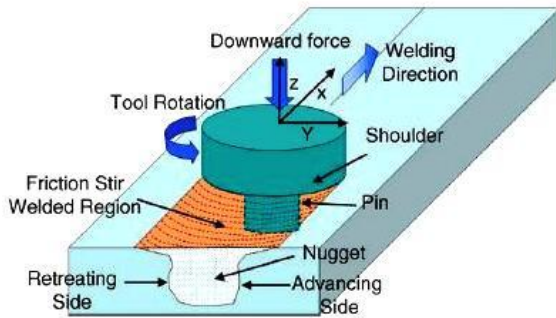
Schematic drawing of FSW process, adapted from [2]
